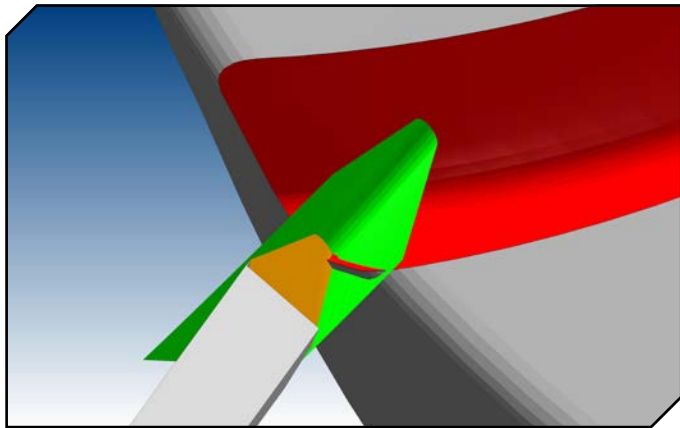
Action of the deburring blade cutting edge at the tooth root and final shape of the deburring edge after a single cut.
